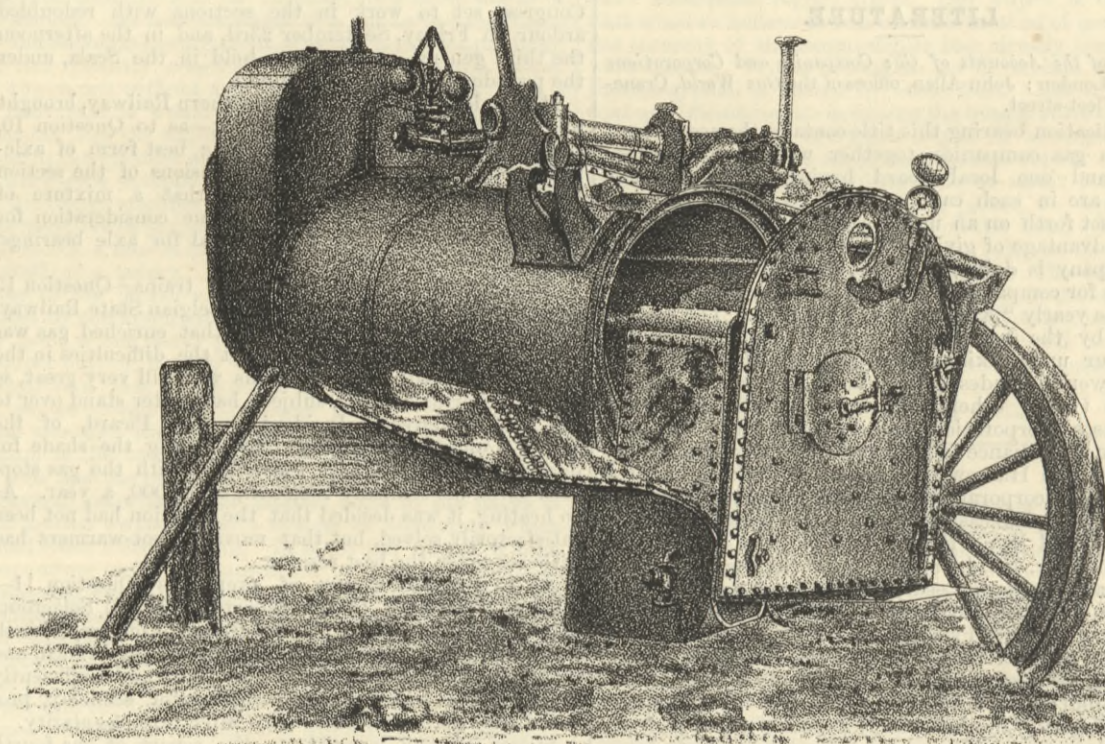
LEFT SIDE VIEW OF THE ENGINE AFTER THE EXPLOSION.
